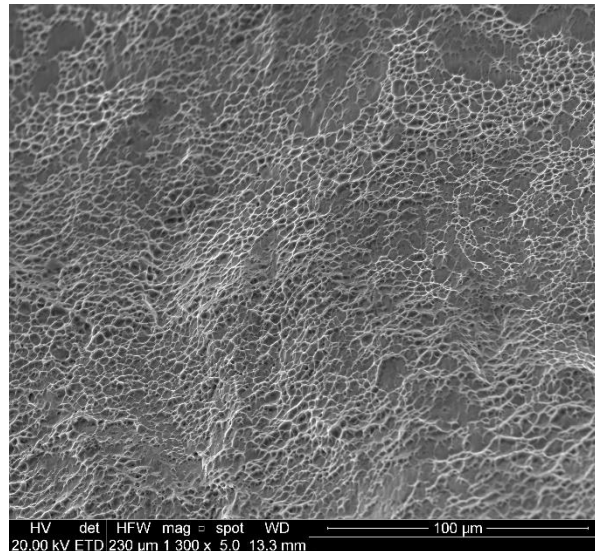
Detail of the dimples characterizing the fracture surfaces of as-built EBM components
